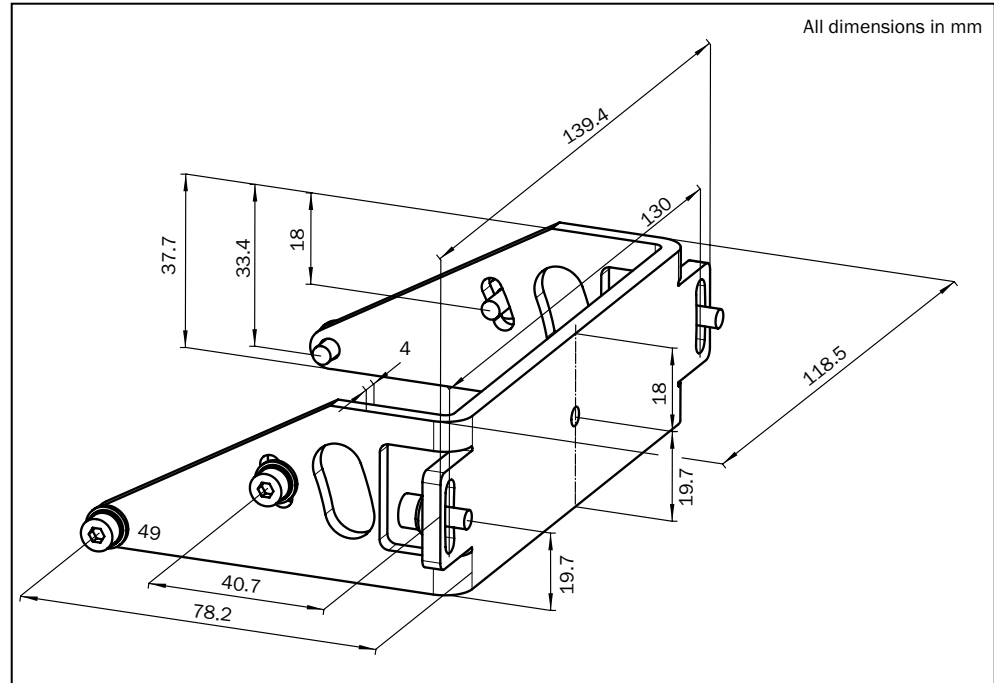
Dimensional drawing mounting kit 2 (part no. 2039302)
